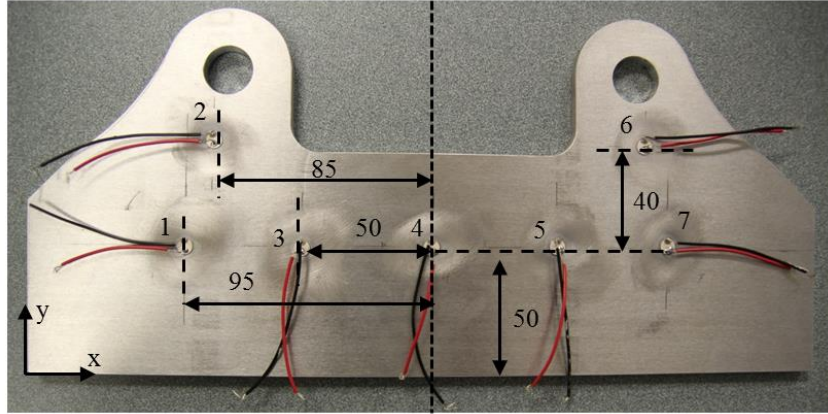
Instrumented aluminum lug joint (dimensions in mm).
